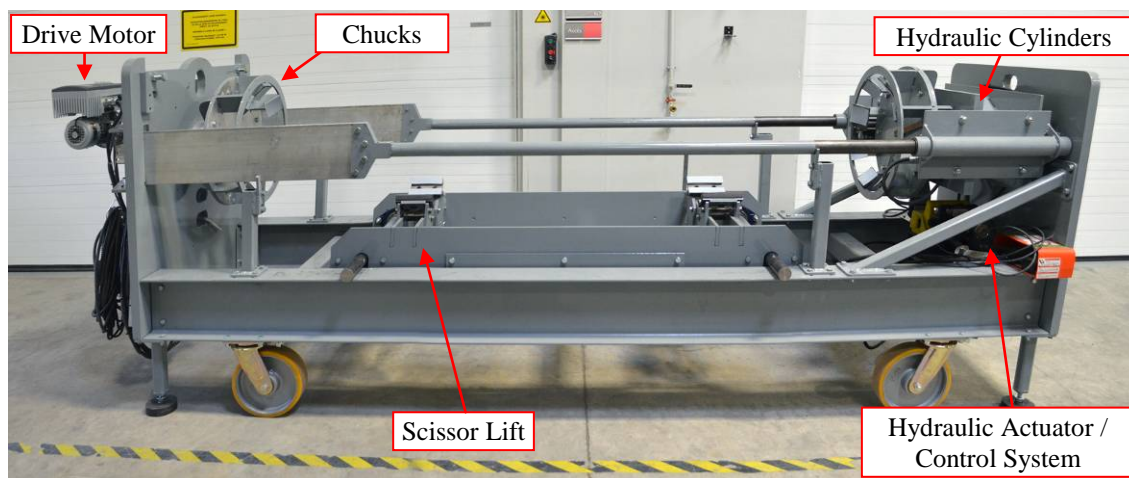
Rotation Equipment (ROTEQ) for Mark II Used Fuel Container welding
